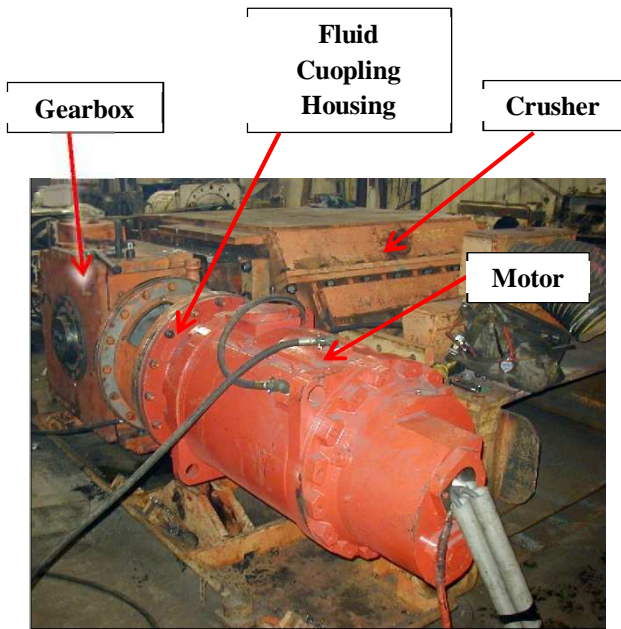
Motor Face Mounted to Hinged Cradle.
